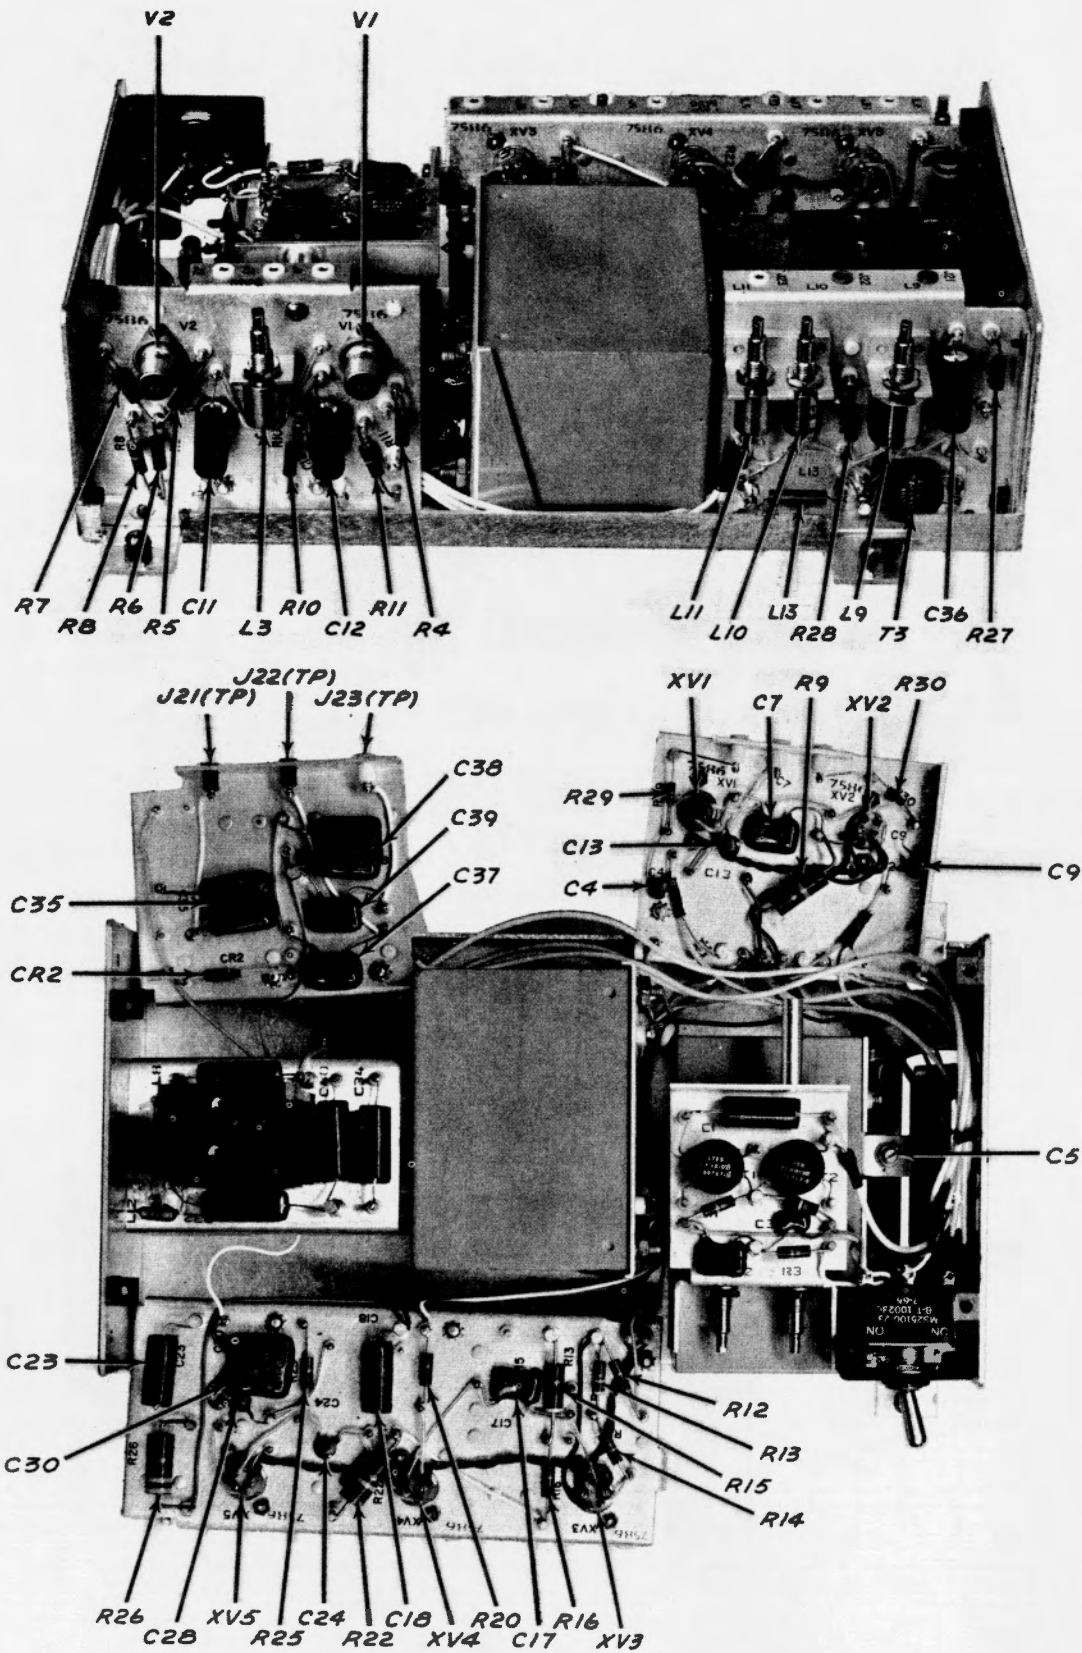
2nd Injector (A) A1A12, Parts Location and Test Points, Disassembled
